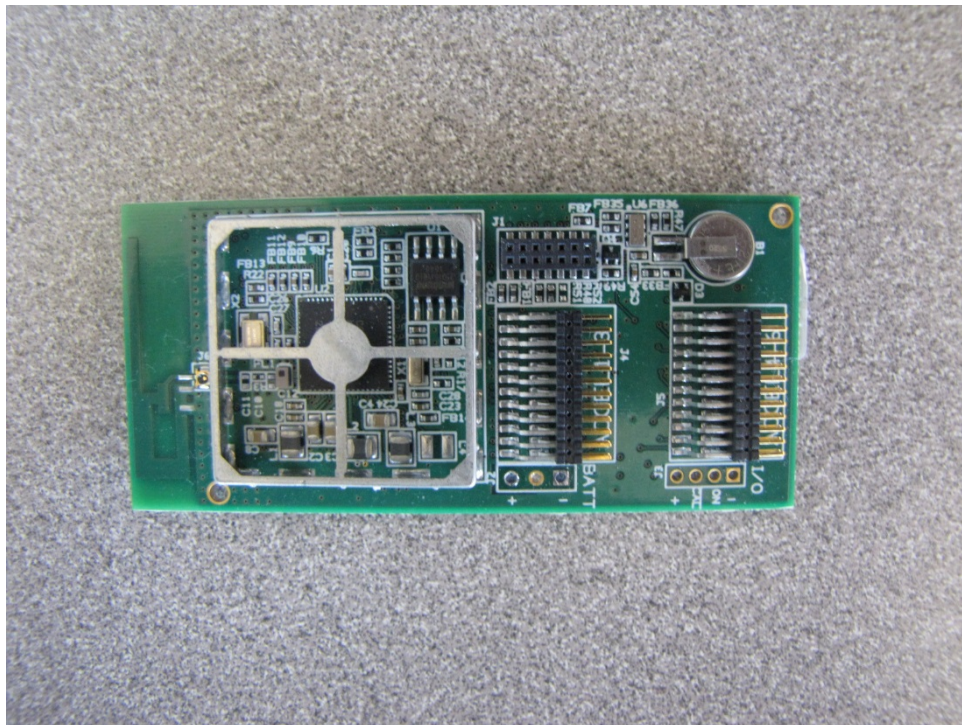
MxEncoder Player Unit (Top – RF Shield removed)
